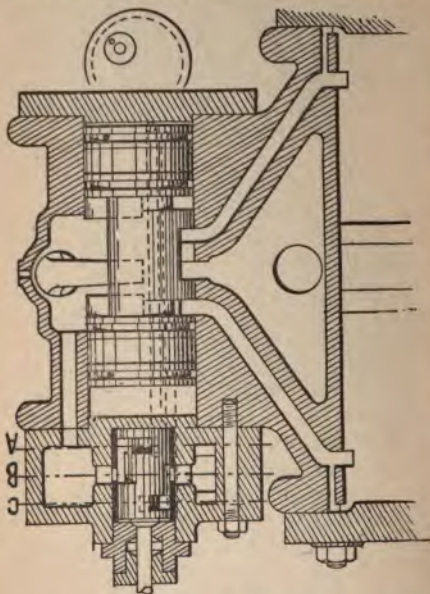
DELAMATER STEAM VALVES AND PARTS.
